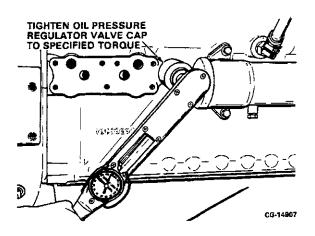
Install Oil Pressure Regulating Valve Assembly
